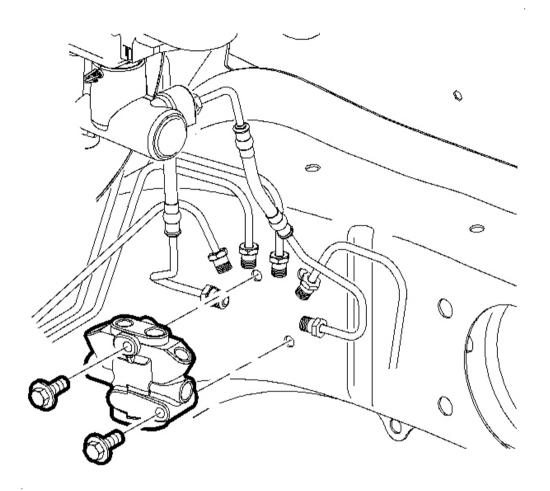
Removing/Installing Proportioning Valve Assembly Courtesy of GENERAL MOTORS CORP.
